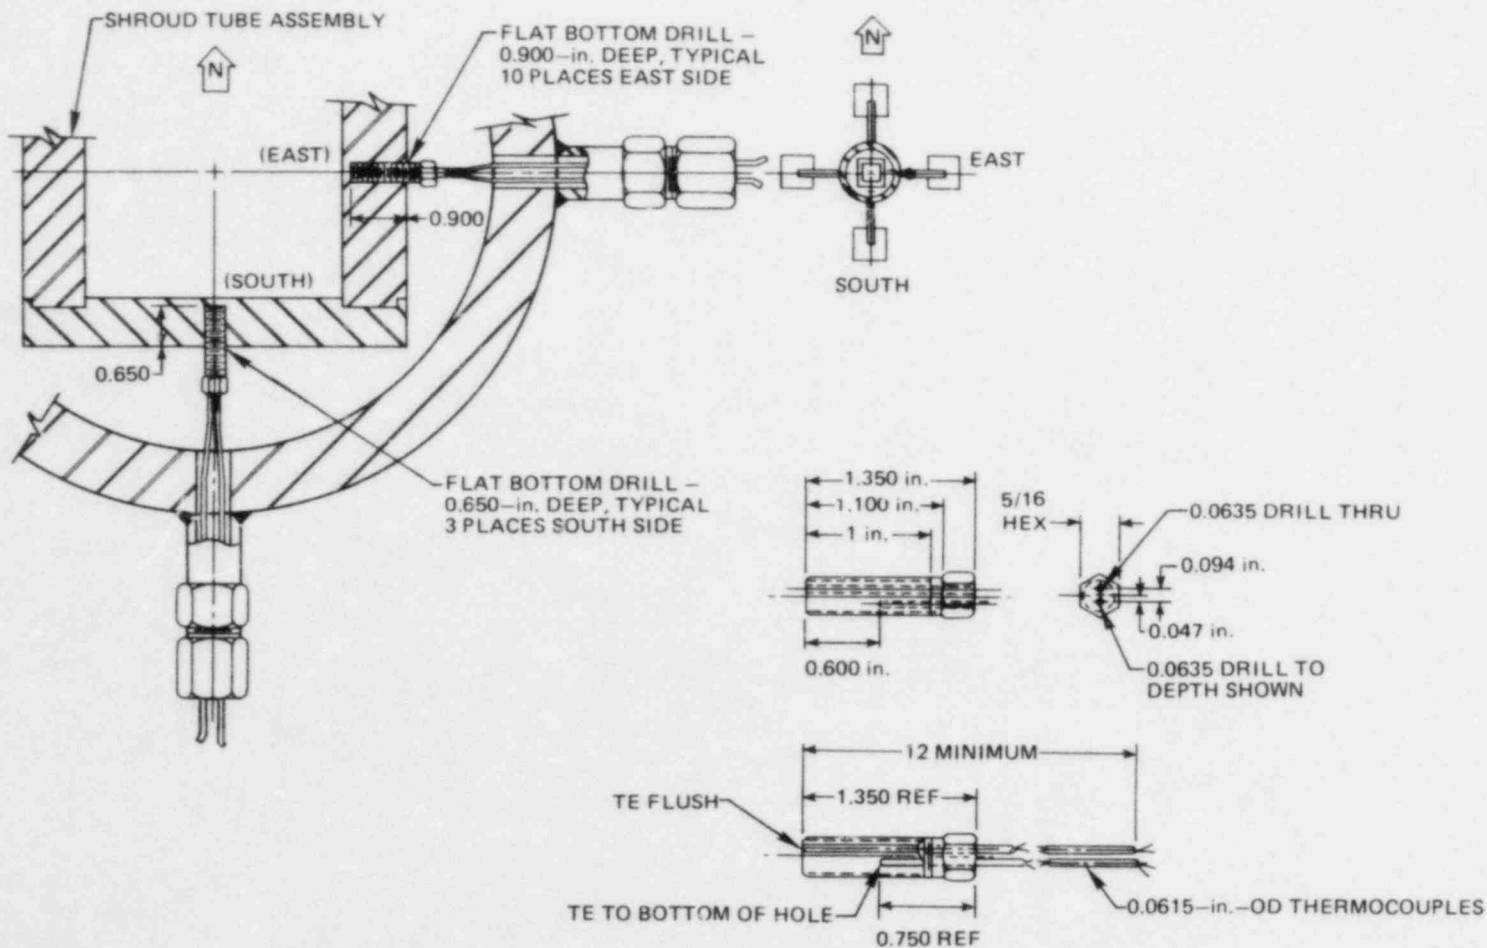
Shroud-wall thermocouple assembly. Dimensions are in inches (1 in. = 2.54 cm).
